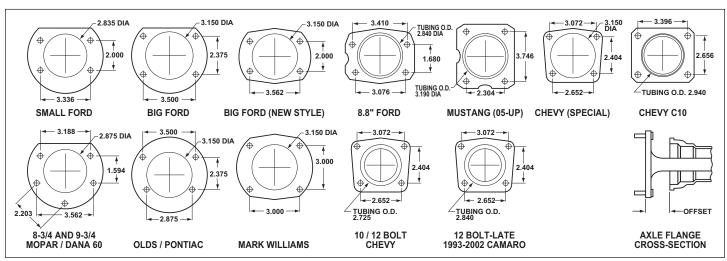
Rear Housing Flange Chart and Axle Flange / Offset Cross-Section
